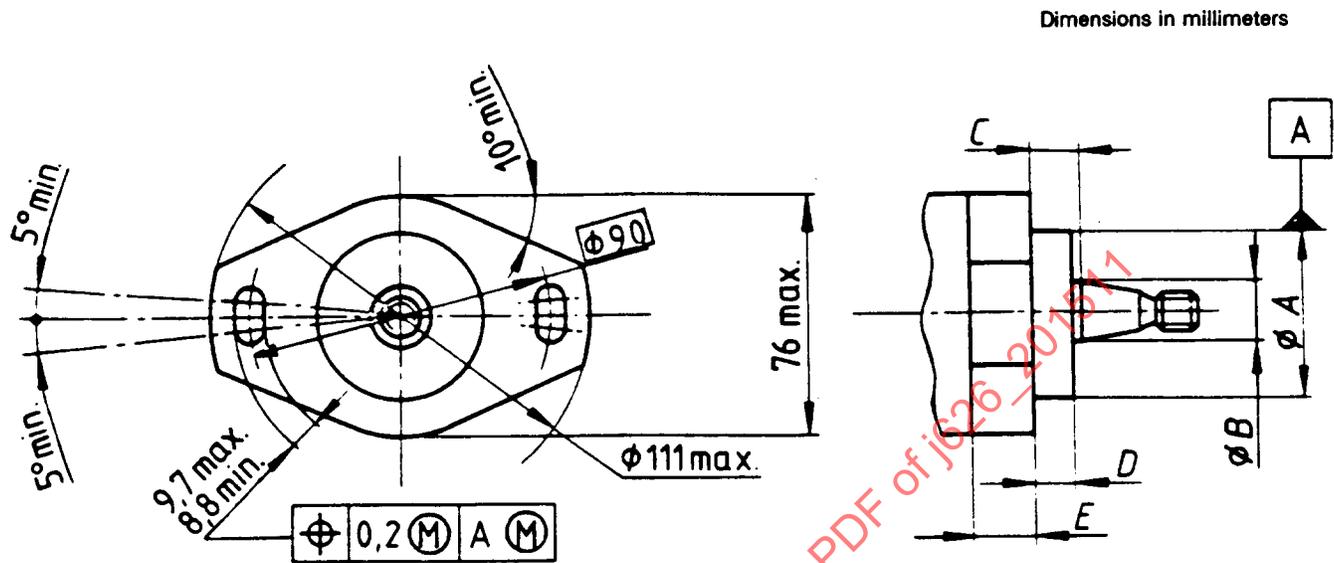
FUEL INJECTION PUMPS—TYPE 1 END-MOUNTING FLANGE
